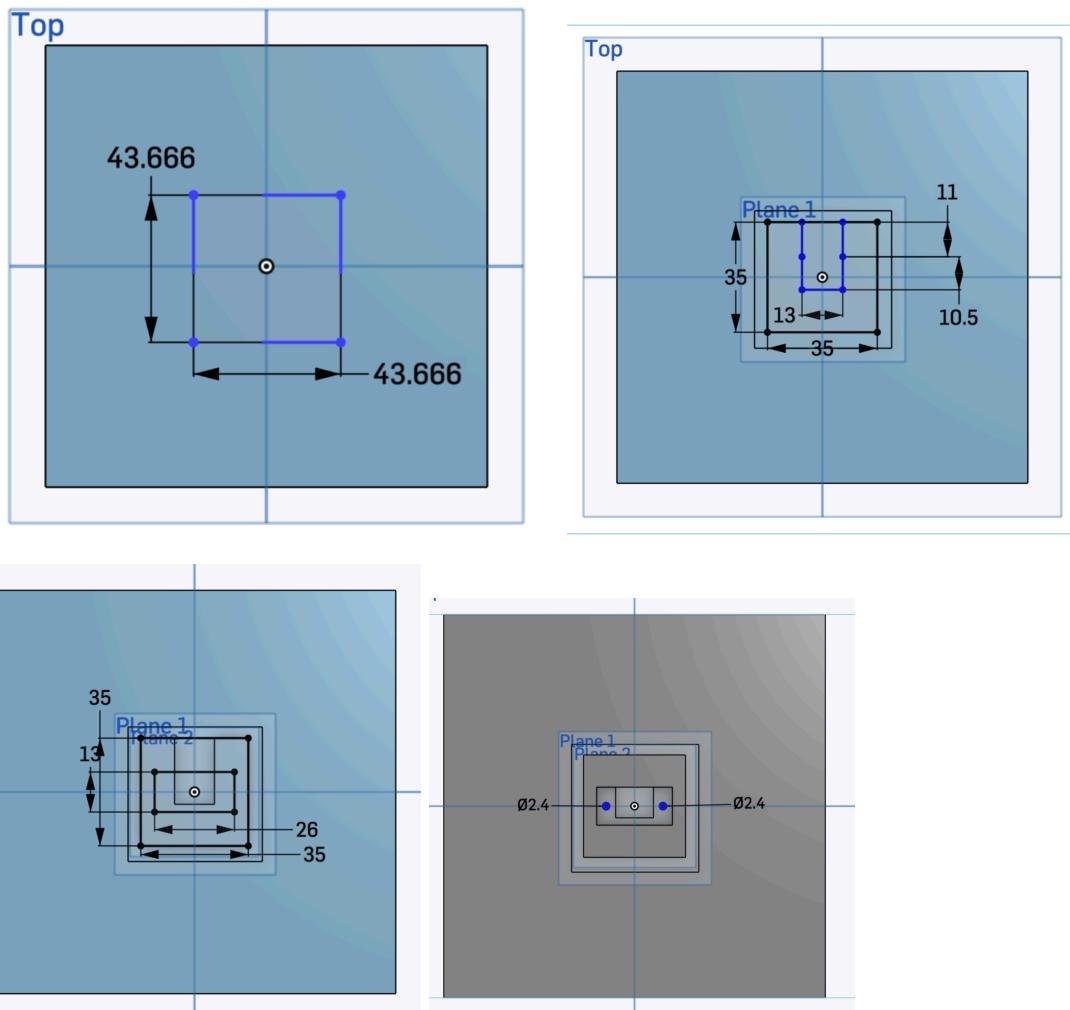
Rotor Board, Tube holders, Tubes, and Magnets
